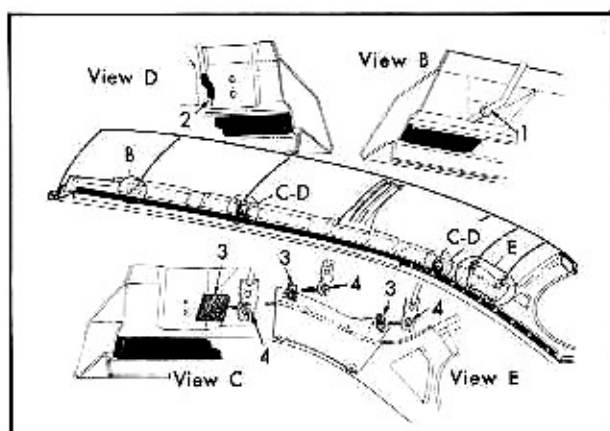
Removal of Headlining Support Wires - (6237)
